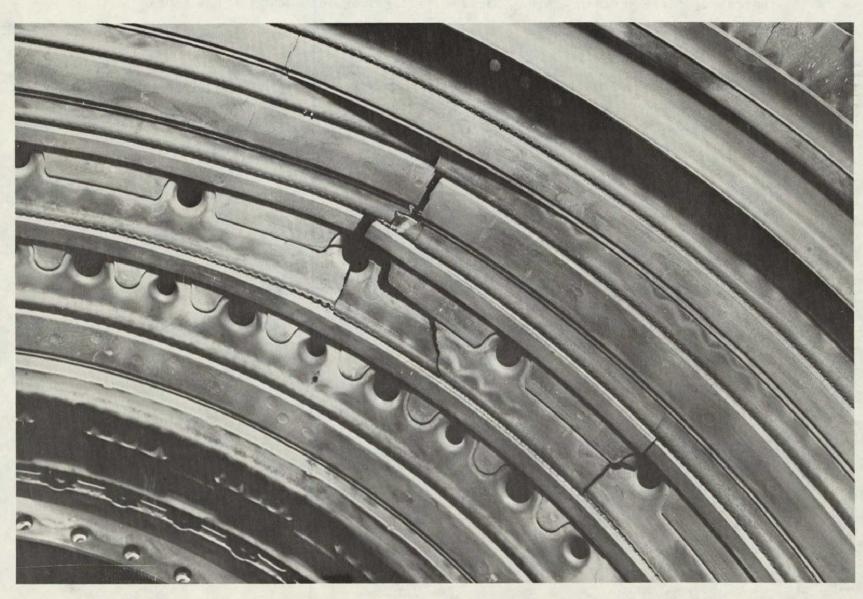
Combustor, Closeup Crack at 7 o'clock.
